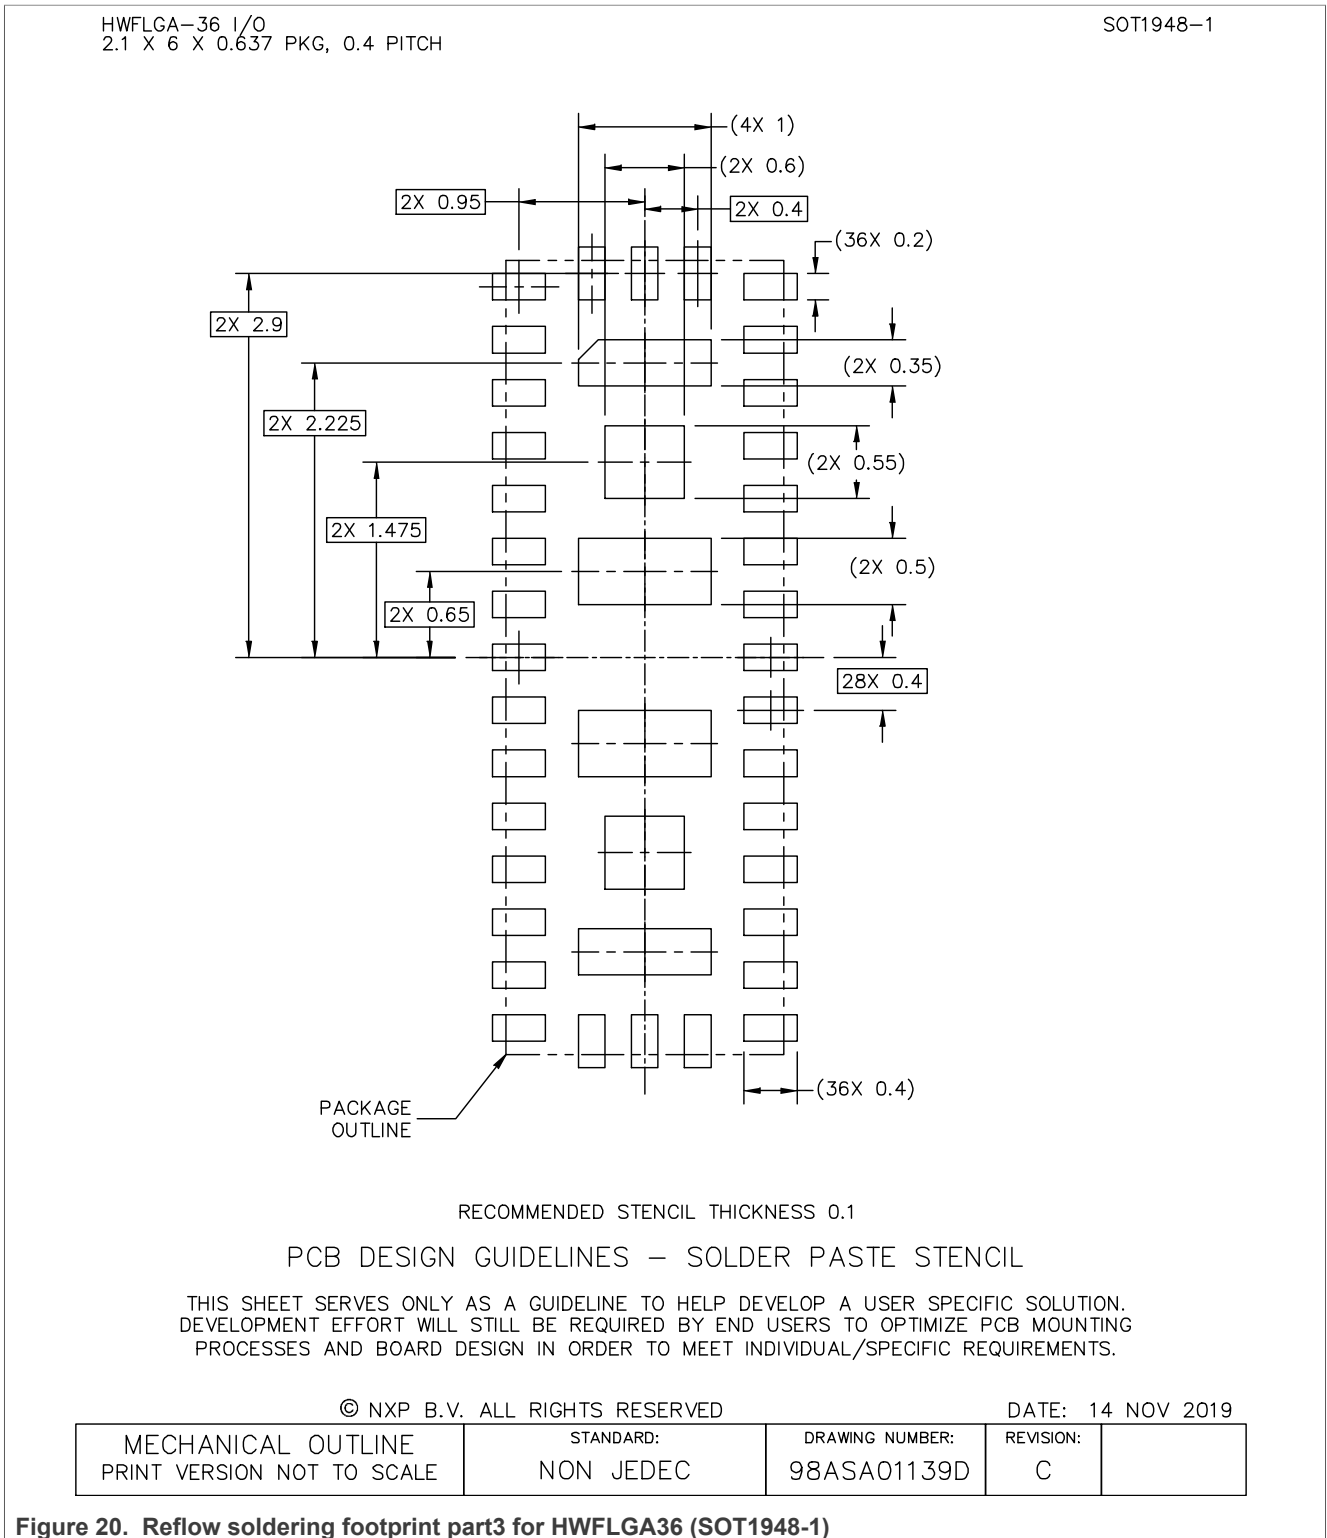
Reflow soldering footprint part3 for HWFLGA36 (SOT1948-1)
